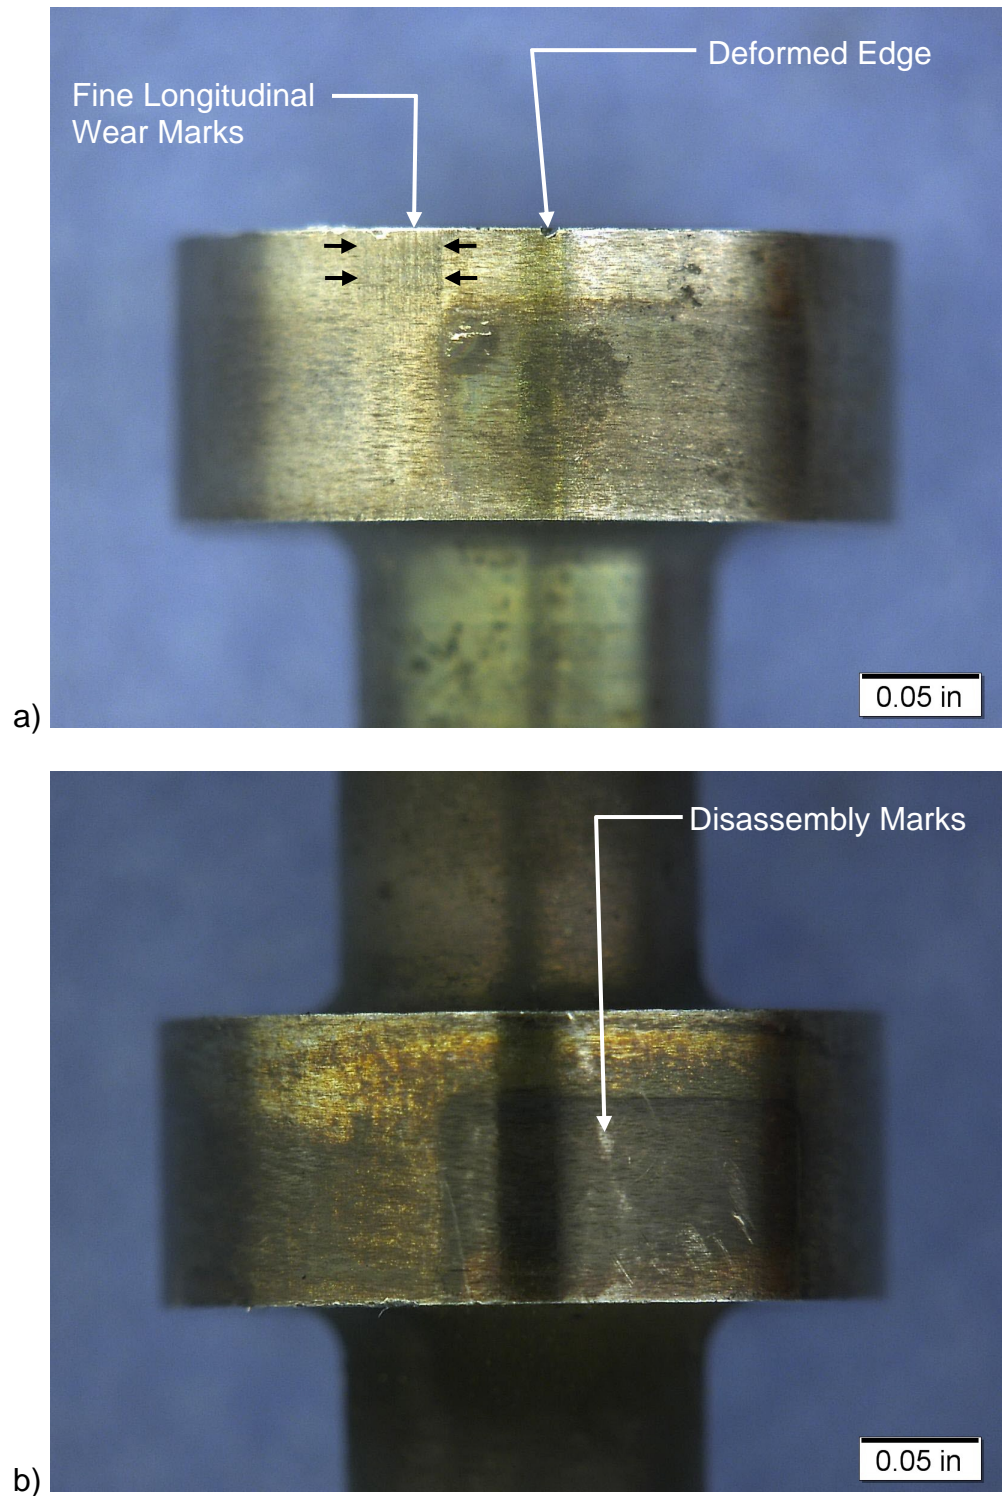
Micrographs of the piston from the Number 1 engine pilot valve assembly; a) right piston valve and b) left piston valve (see Figure 6).
